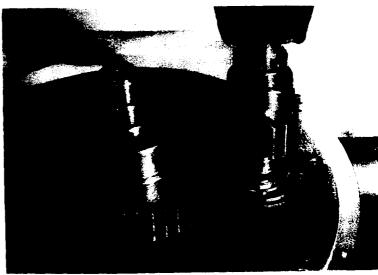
Successful insertion of a gear-shaft assembly into a bearing harbeen achieved by using a three-axis strain gage sensor mounted on the gripper's fingers to provide electronic compliance. (Courtesy of T.A. Brownell, Genera Electric Company, Corporate Research and Development, Schenectady, NY. From reference [40].)
